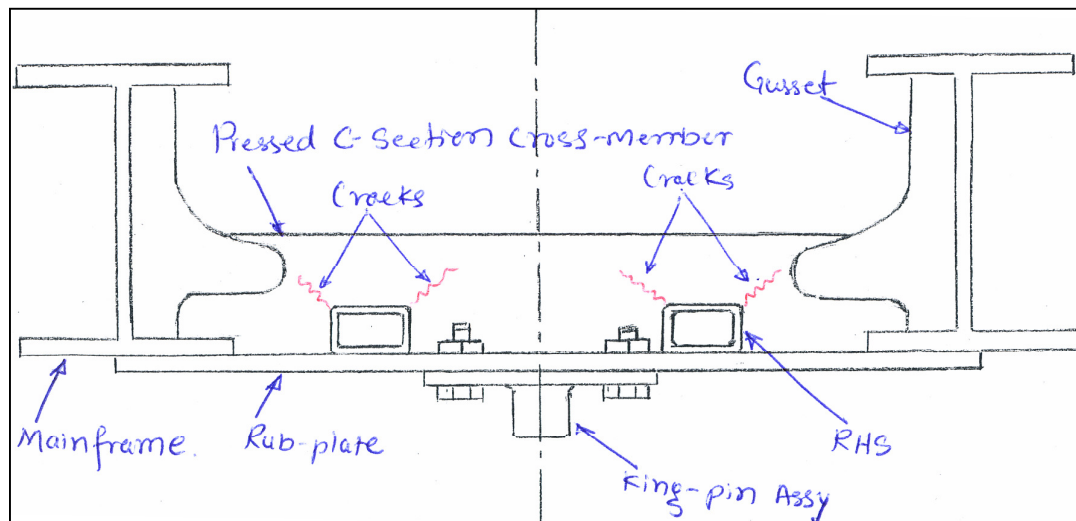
Pictorial view of the Rub-plate assembly; showing the typical weld crack appearance on cross-member pressing
